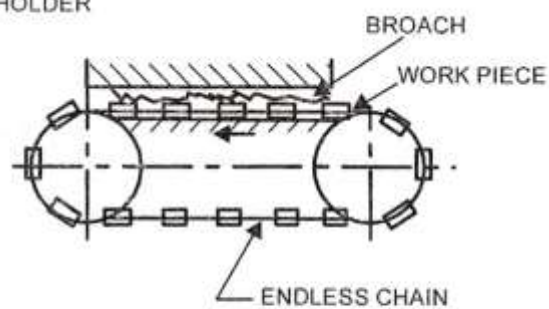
HORIZONTAL CONTINUOUS BROACHING MACHINE
